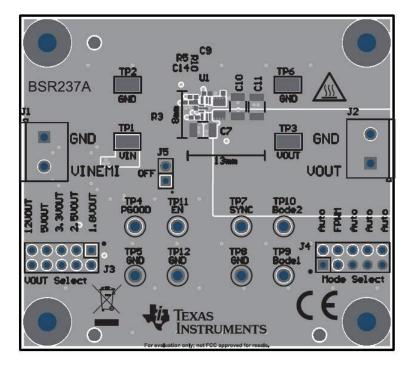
PCB Top 2-D (TPSM33625FEVM)
